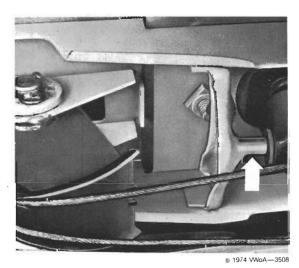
Guide pin (arrow) engaged in the plastic guide sleeve in the front shift rod.
